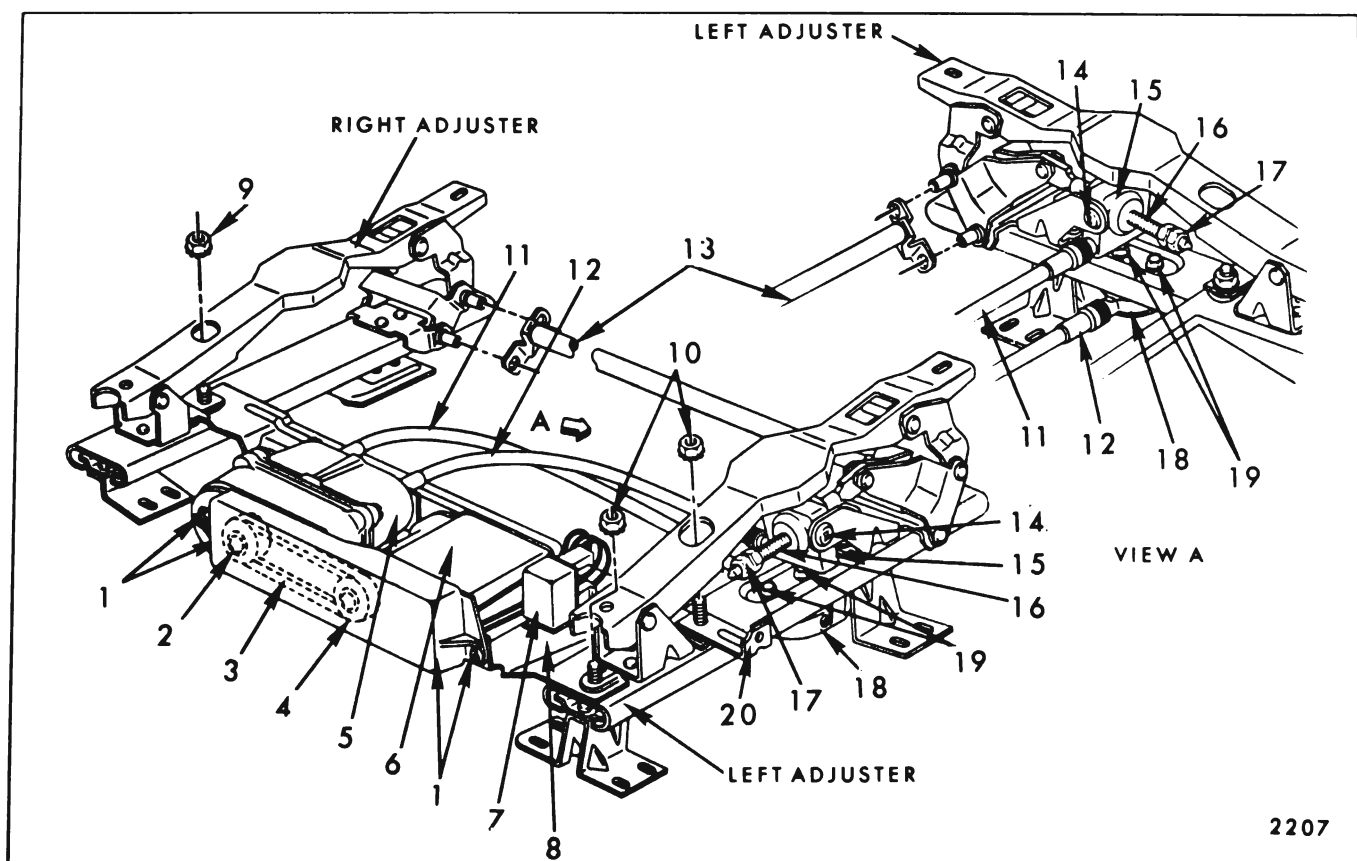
Four-Way Bucket Seat Adjusters
